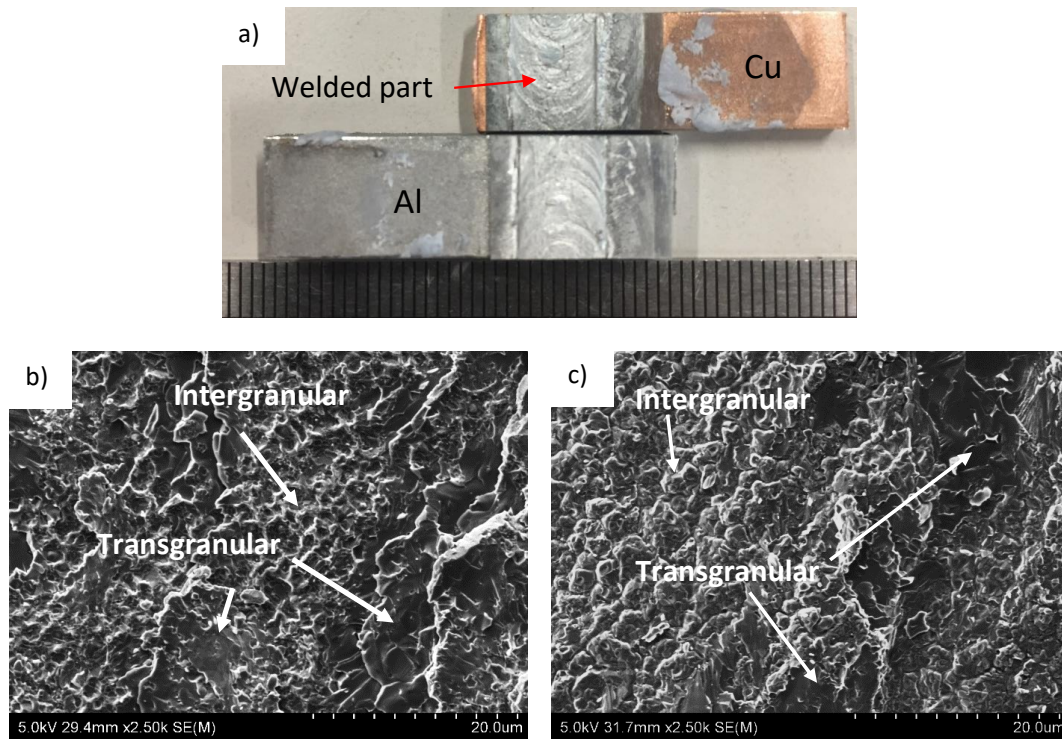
9 (a) Fracture surface of broken tensile shear test sample of weld with d_p of 0.1 mm; (b) fracture surface on the aluminium side; (c) fracture surface of copper side.
